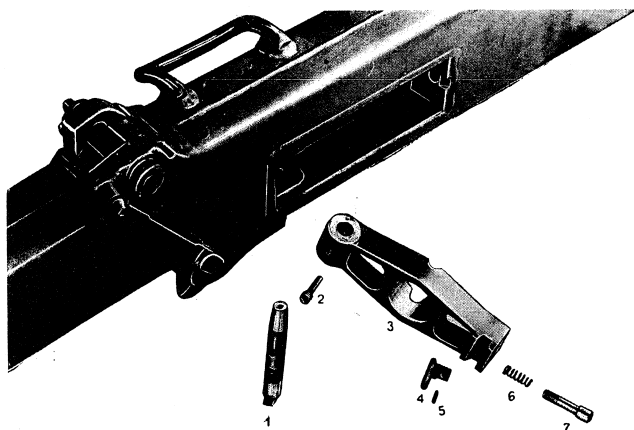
CARRIAGE TRAILS CONNECTOR — DISMANTLED
